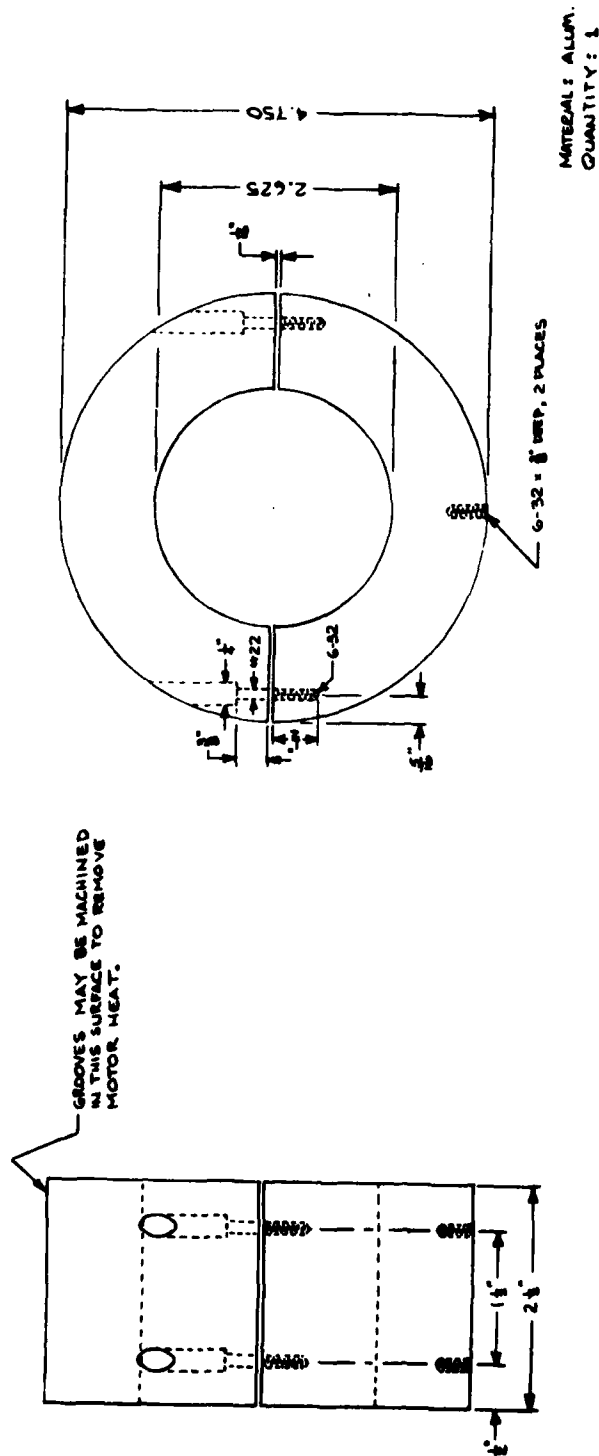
Part 20: (not shown in Fig. 3): the motor clamp
